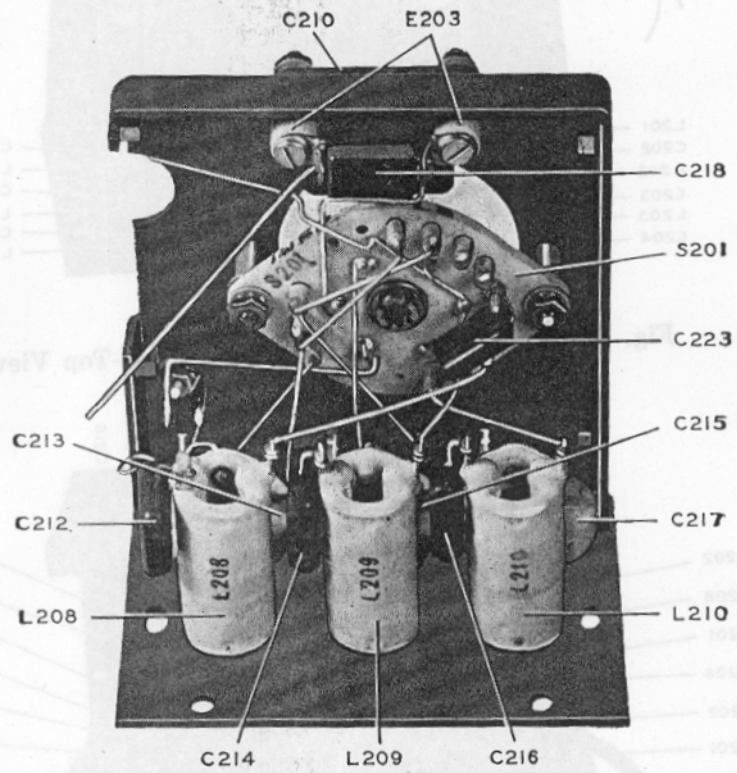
Receiver Oscillator Tank Assembly—Side View
